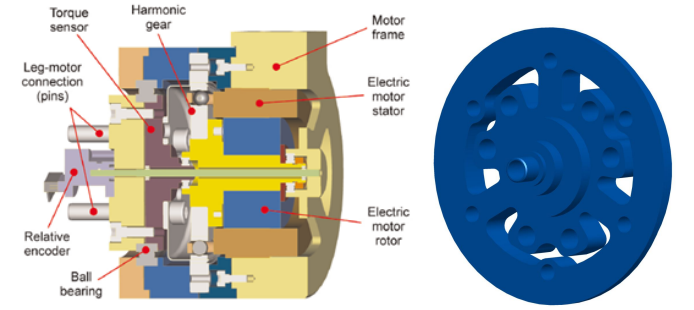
Left: Electric motor assembly: cross-section of the CAD model. Right: Torque sensor CAD model.
